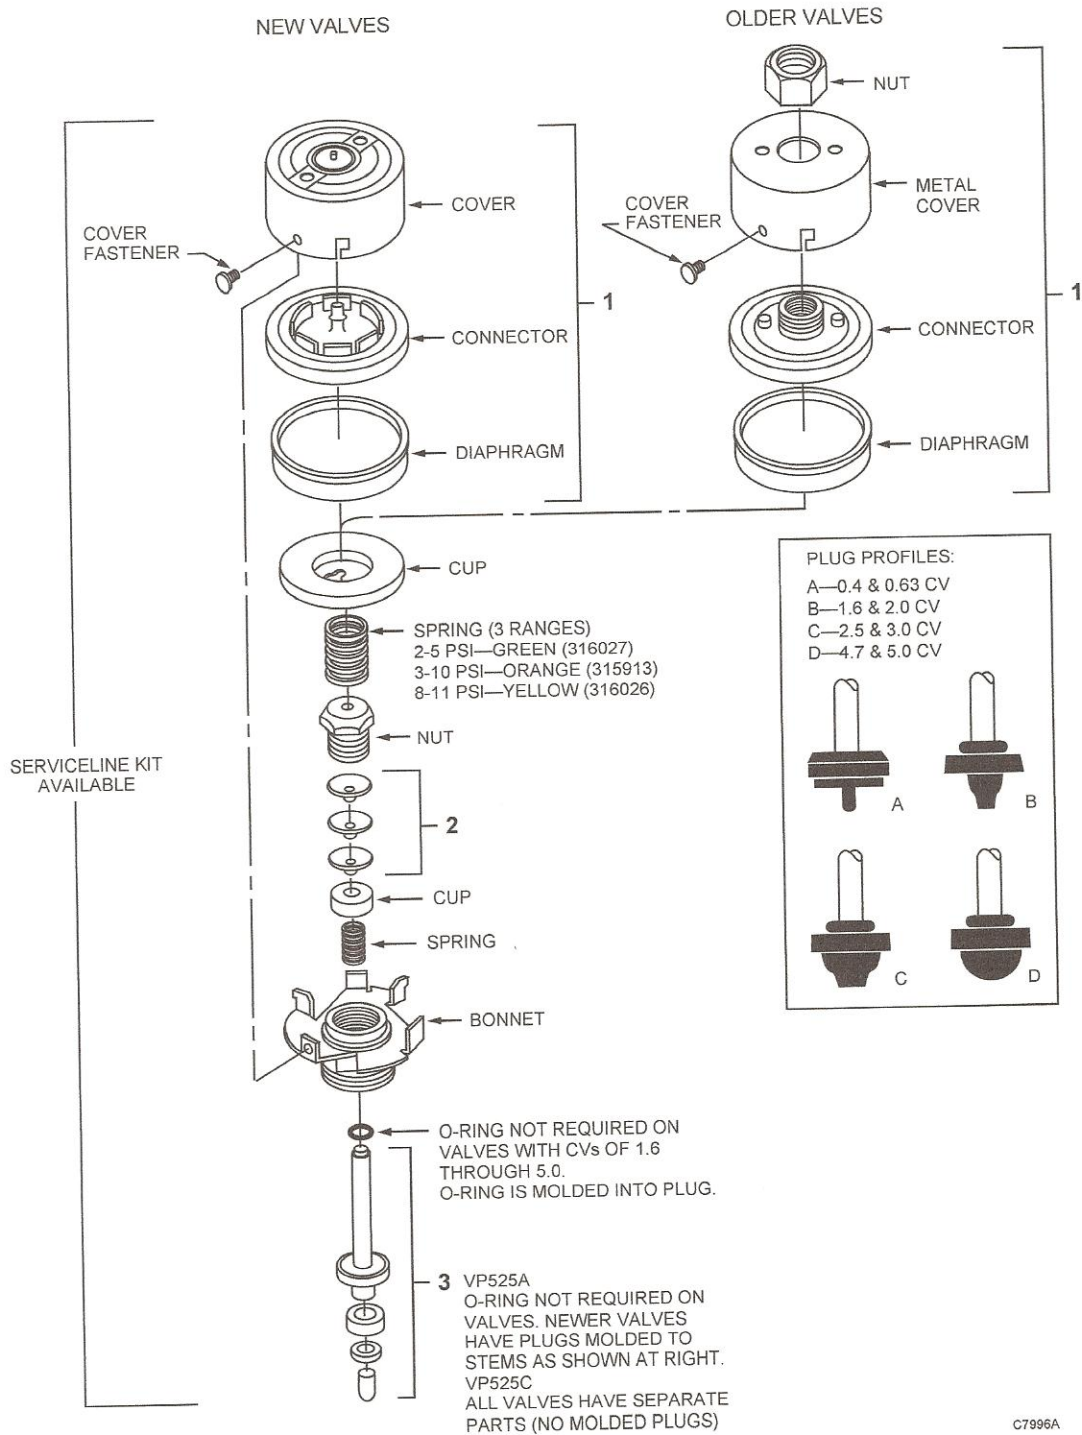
Exploded view of top and insert assemblies (see Table 4).
